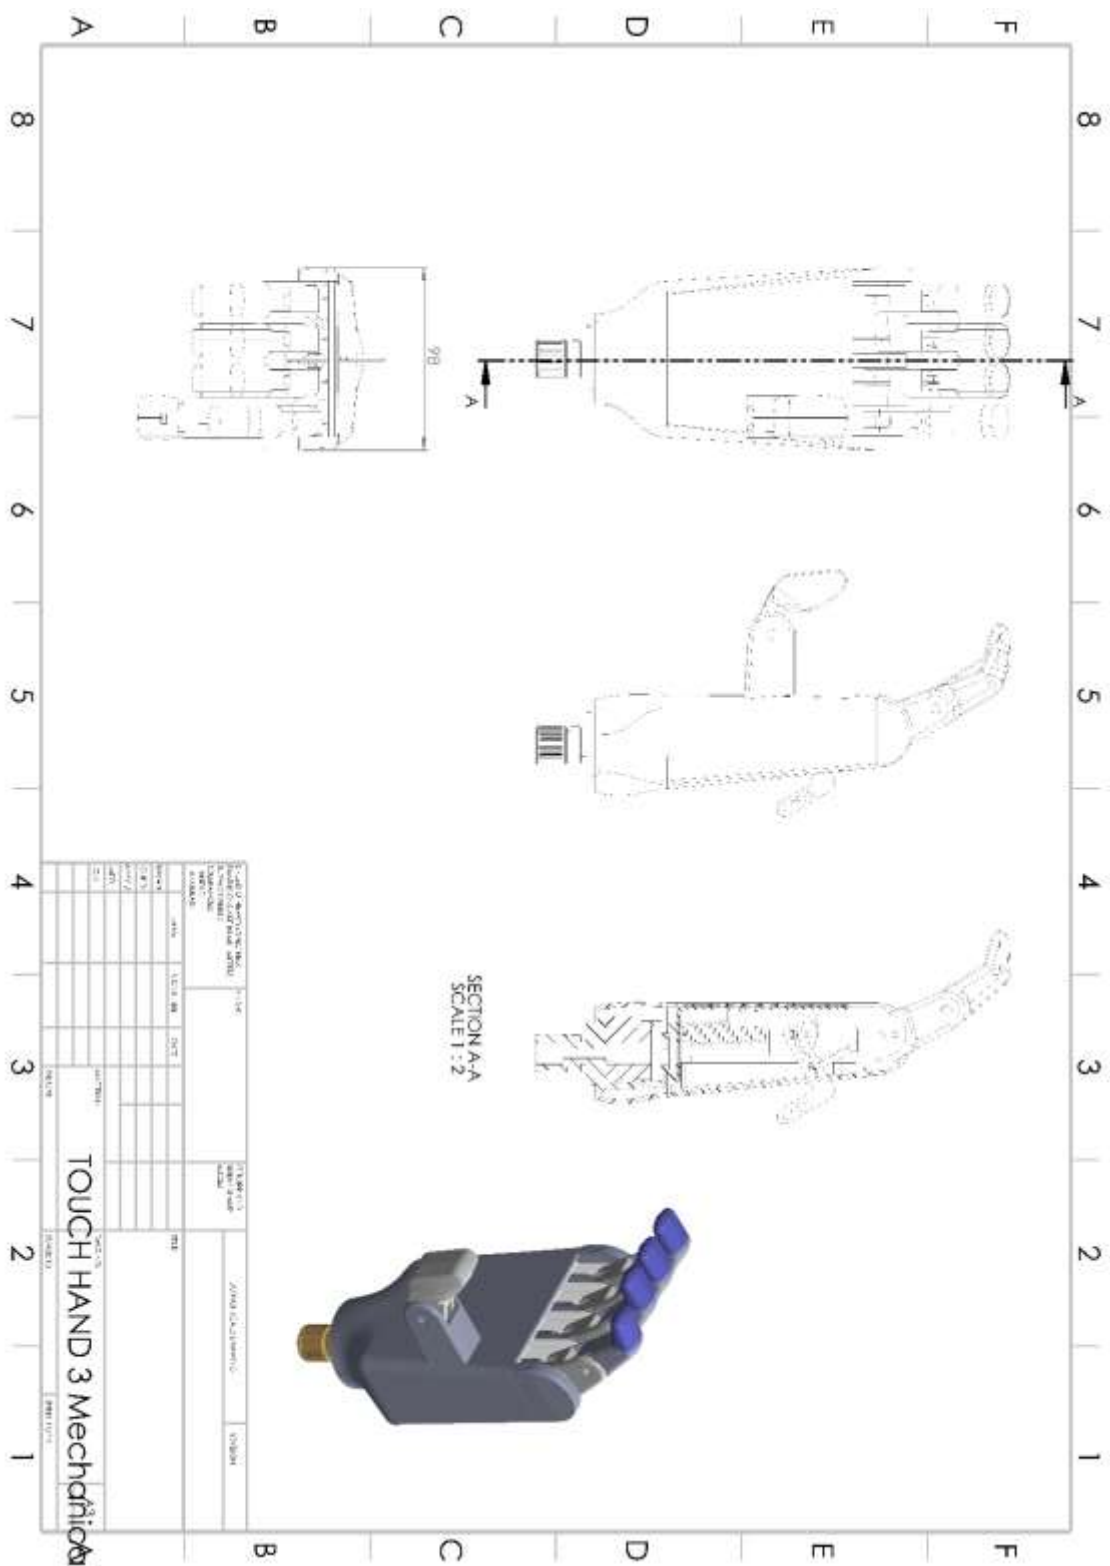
Touch hand 3 mechanical hand assembly drawing
